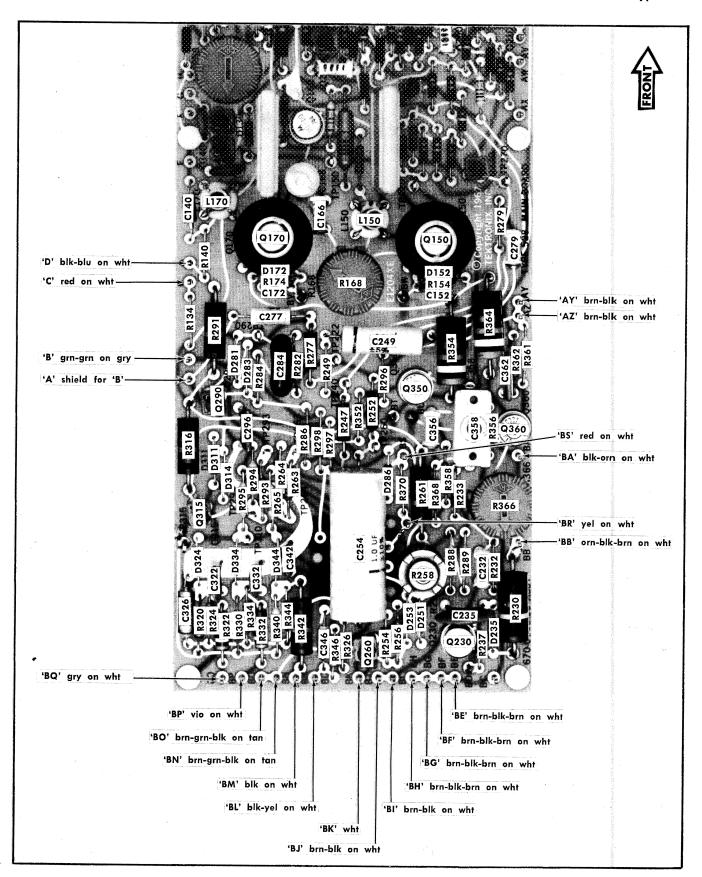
A. Partial top view of Main board showing components and wire color codes for instruments below SN B080560.
